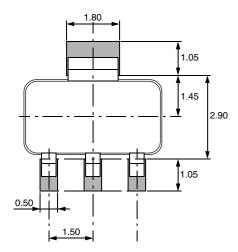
Recommended footprint SOT89B-1, Dimensions in mm. All dimensions are for reference only. The pad size may vary depending on the requirements of the soldering process.
